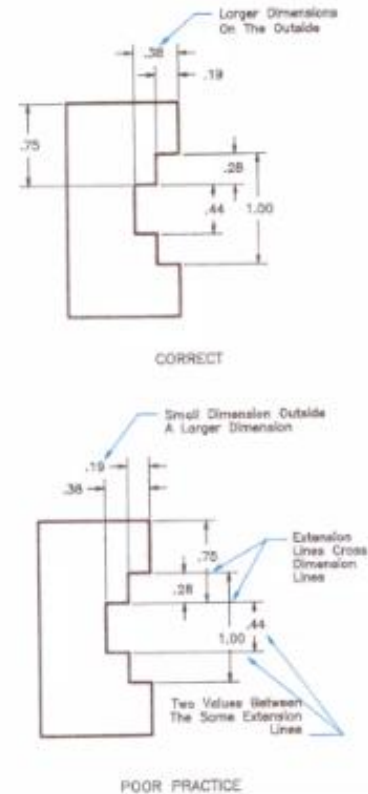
Dimensions are arranged to avoid crossing dimension and extension lines. This normally requires that the large dimensions be placed outside smaller ones.
